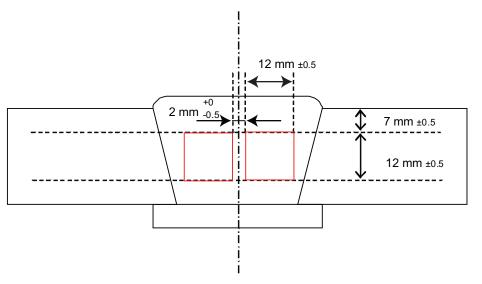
Position of Pre-forms Inside the Welded Zone—Schematic View
